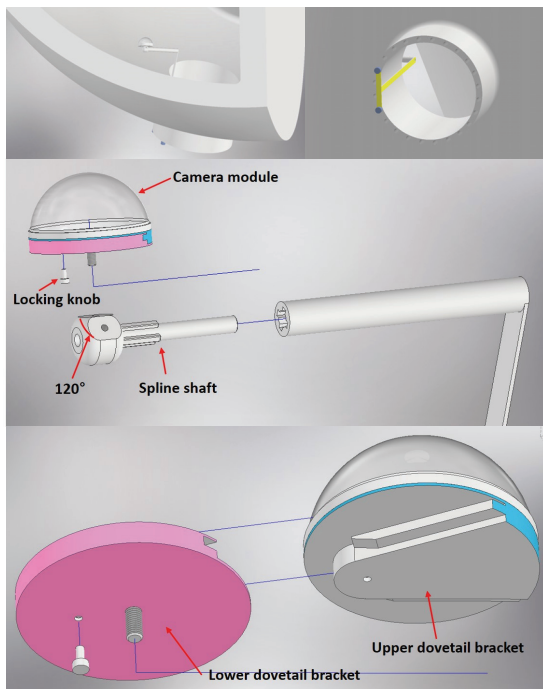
3D CAD modeling of the 120° bracket and boltless dovetail joint
